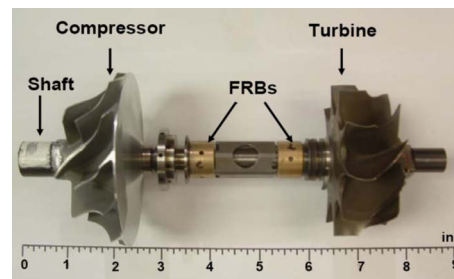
Automotive turbocharger: rotor assembly and floating ring bearings (FRBs)
